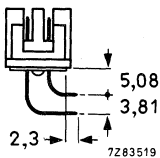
Male part with 90° angled dip-solder pins; dimensions are identical with those in Fig. 2, except as shown.
